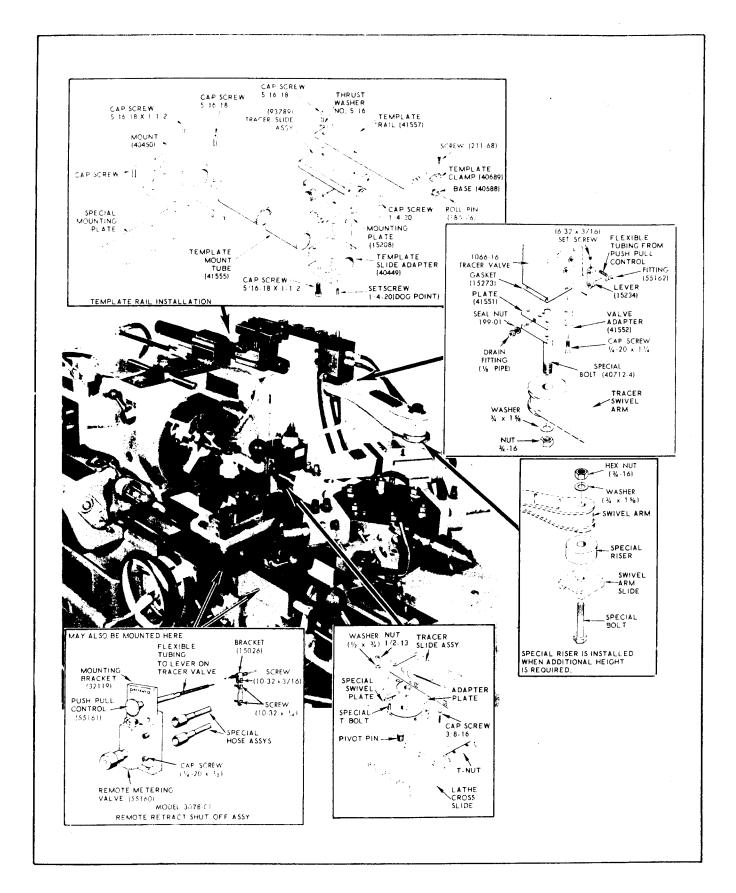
Typical Installation of a Mark Series Lathe Tracer Attachment on a Turret Lathe
